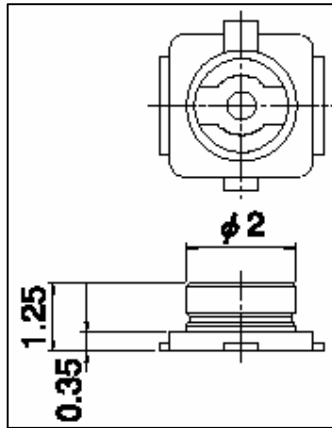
Mechanical dimensions of U.FL-R-SMT connector
